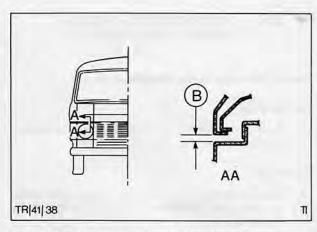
Hood setting - underside of hood to grille panel B - 7,5±1,5 mm
